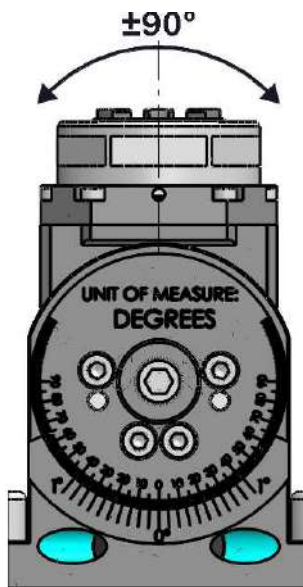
Example Adjustable driven tool $\pm 90^\circ$
